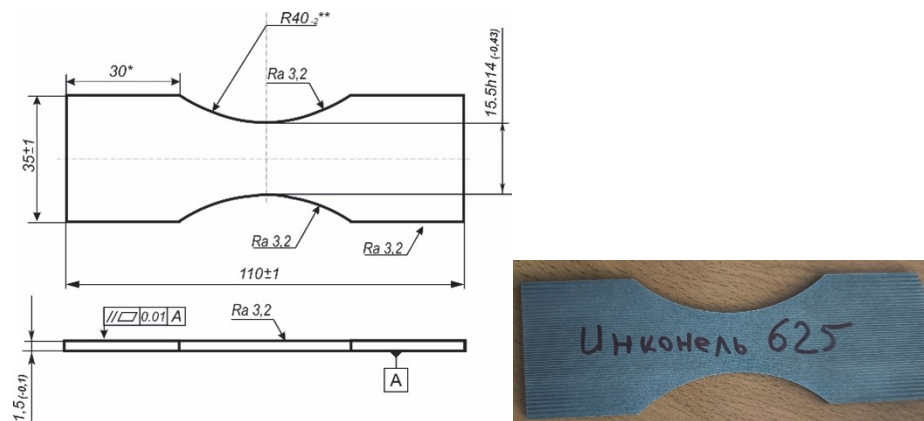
Samples for high-cycle fatigue testing: drawing (left) and appearance (right).
